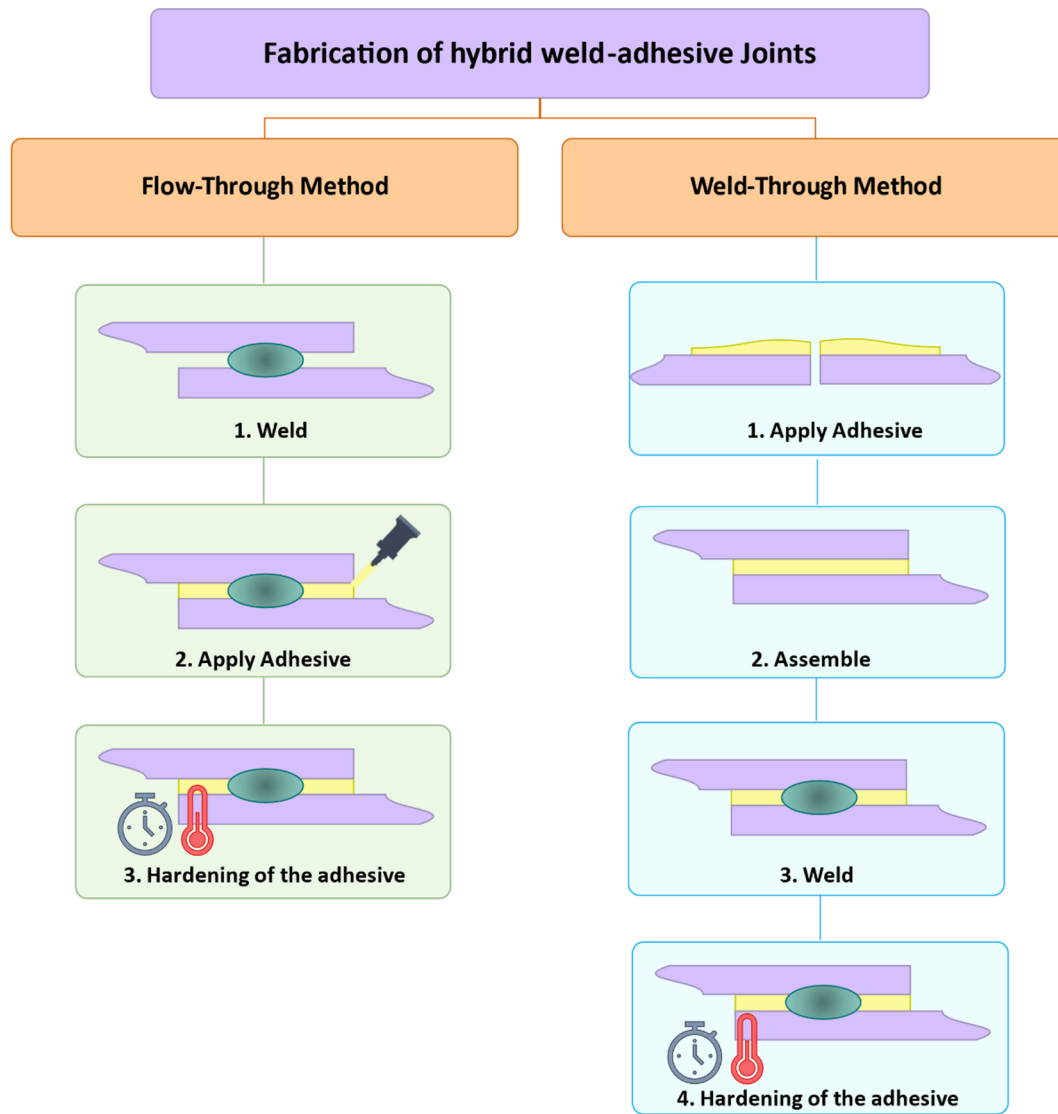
Various fabrication processes of hybrid weld-adhesive joints.
